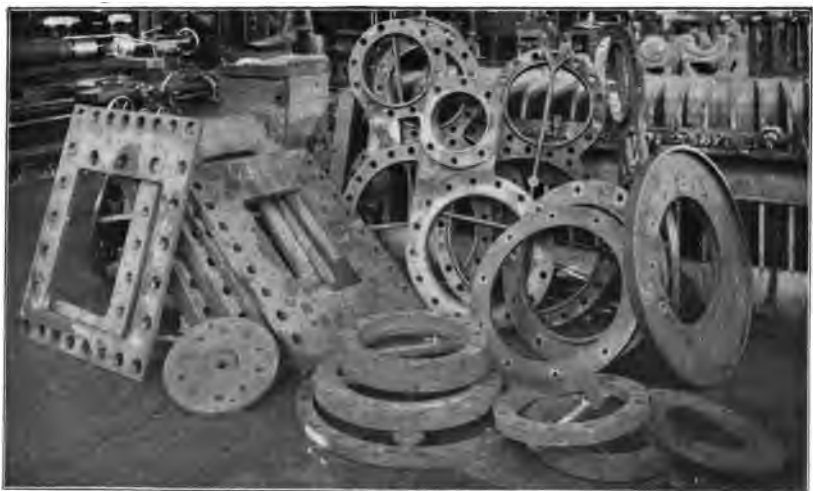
CYLINDER, CYLINDER HEAD AND STEAM CHEST JIGS FOR DRILLING STUD HOLES ACCURATELY FOR INSURING INTERCHANGEABILITY OF PARTS.
